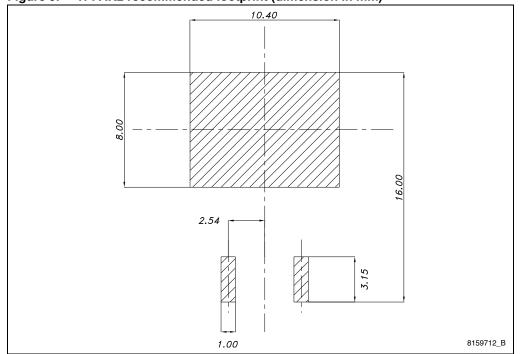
H²PAK2 recommended footprint (dimension in mm)
